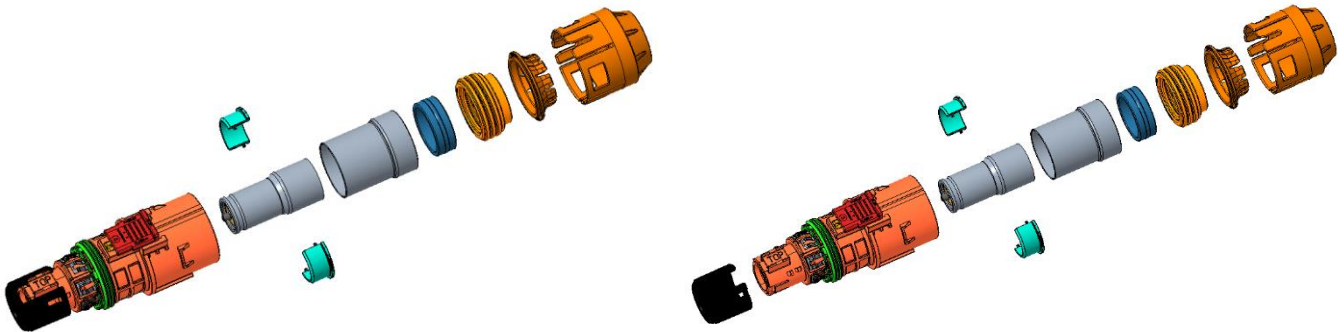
HVP-HD1400 Plug Assy (Tool Access) overview
